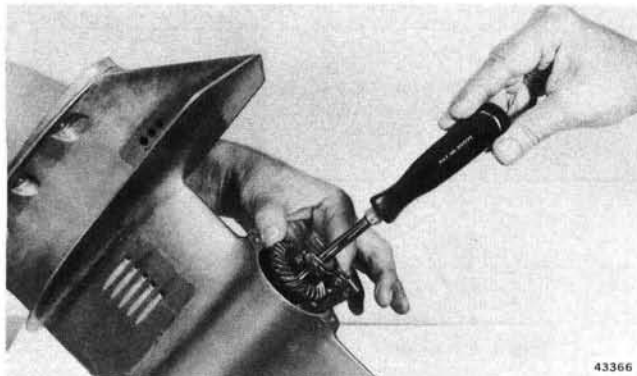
Guiding Forward Gear and Yoke Into Gearcase
